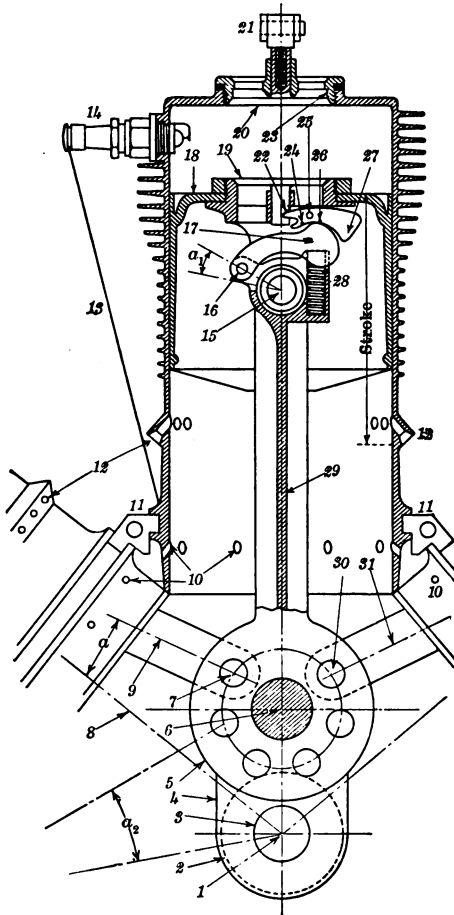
OLD TYPE GYRO MOTOR, SHOWING VALVE OPERATED BY OSCILLATION OF CONNECTING ROD
